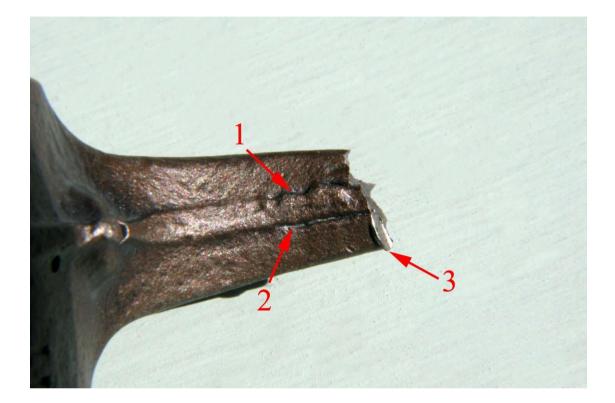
Underside of the broken rocker arm. Arrow 1 and arrow 2 indicate the grooves to either side of the mould joint line. Arrow 3 indicates a flow lip associated with the area of smeared metal on the fracture surface.
